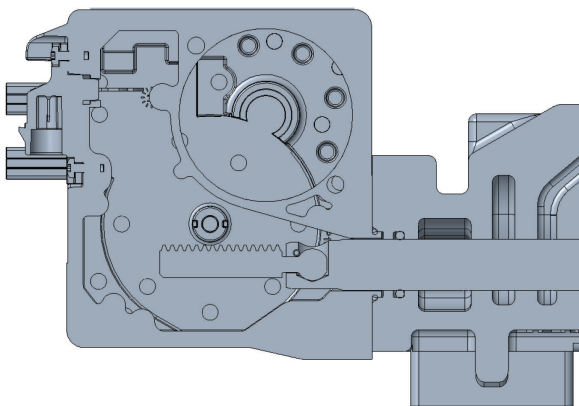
Stepper Motor Integration for manipulating the hydraulic valve spool
